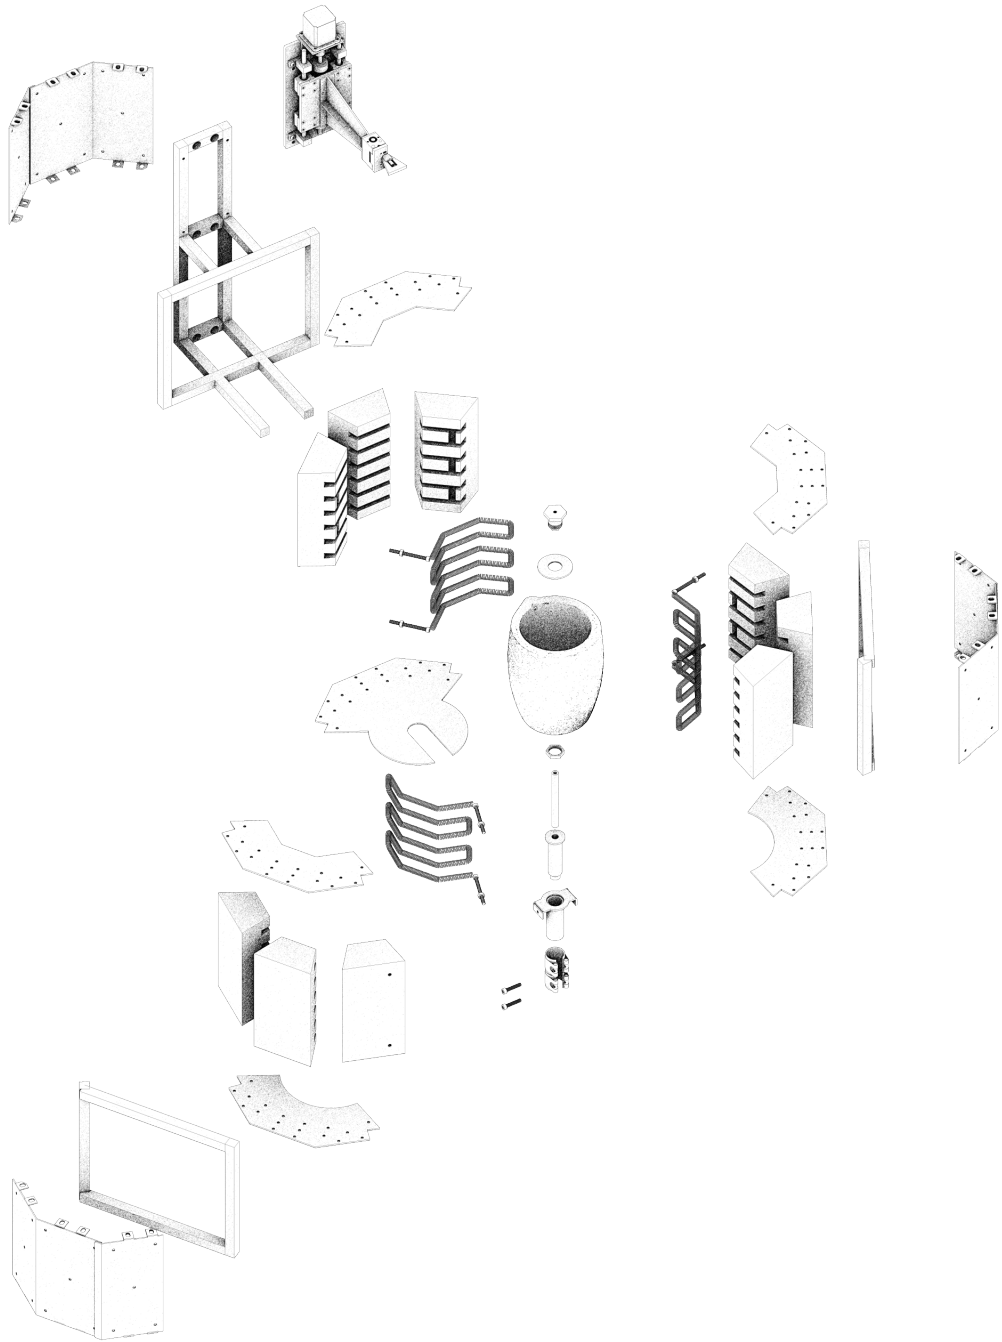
Exploded Axonometric Drawing of Furnace Assembly
